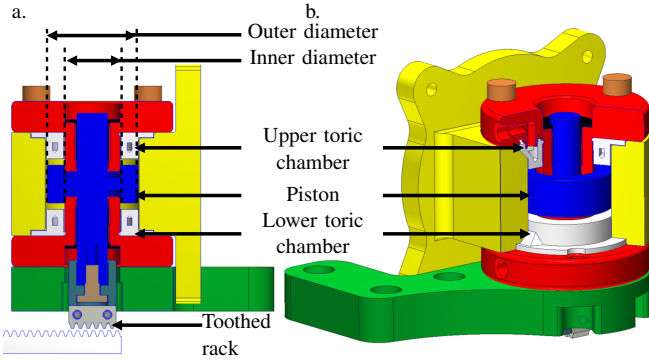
a. CAD Section of a gripper. b. 3D view of a gripper, partial section
